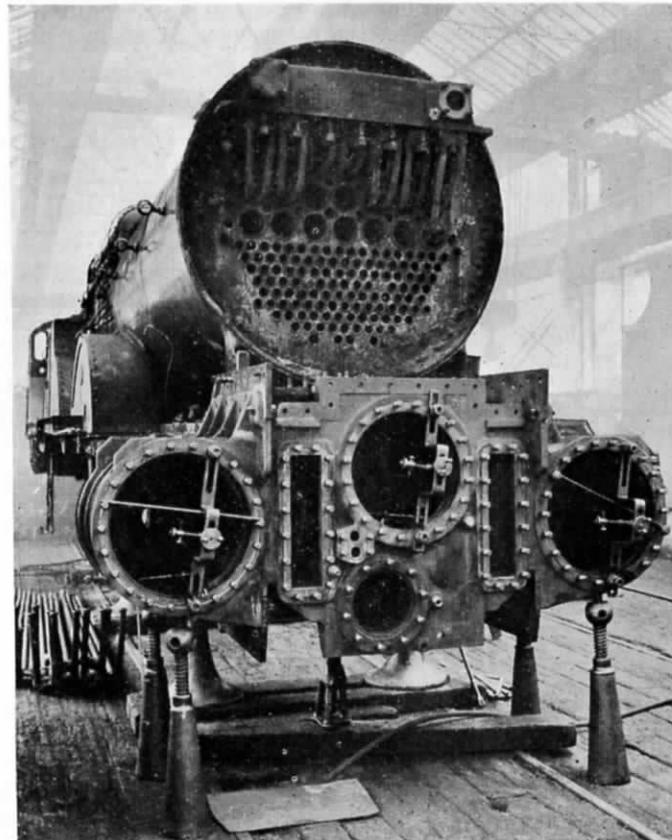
VIEW OF FRONT END, L.M.S.R. THREE-CYLINDER COMPOUND LOCOMOTIVE, SHOWING H.P. AND L.P. CYLINDERS AND STEAMCHESTS.
